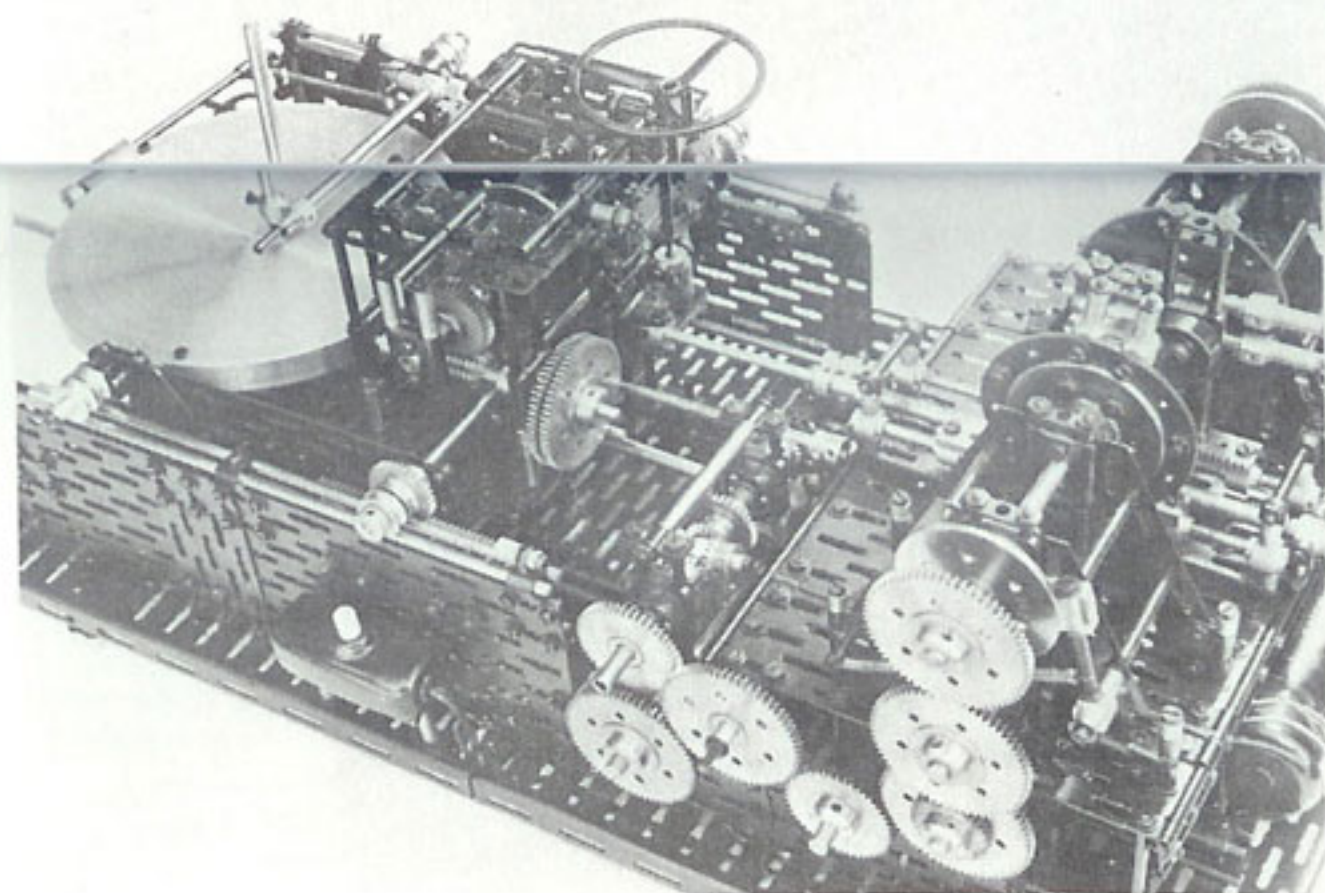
Seventh And Final Full-Sized Model Assembled With Standard FAC Kit Parts. Next Step - Design Engineering
